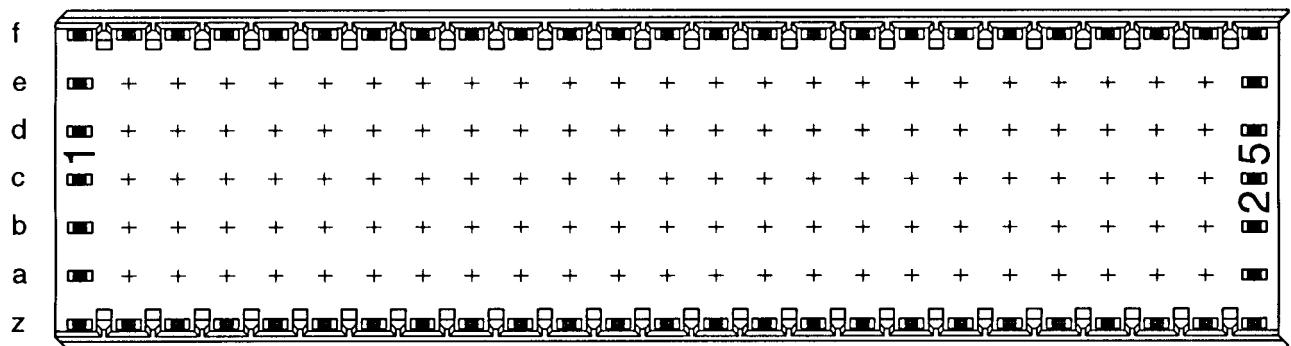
Dimensions of style B, fixed 50 mm module without MPC (five rows)
